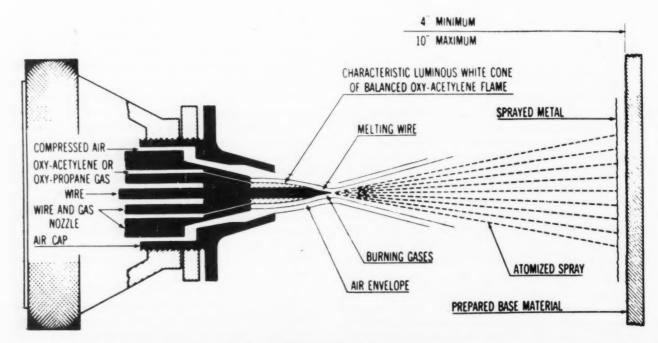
Wire Spray Gun Nozzle Cross-Section.
